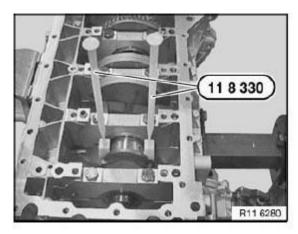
Identifying Special Tool 11 8 330 Courtesy of BMW OF NORTH AMERICA, INC.
